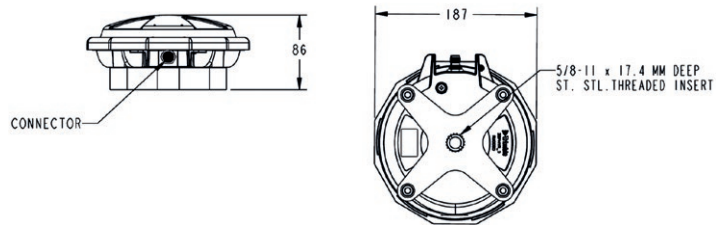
Technical Drawing of Zephyr 3 with 5/8" mounting
